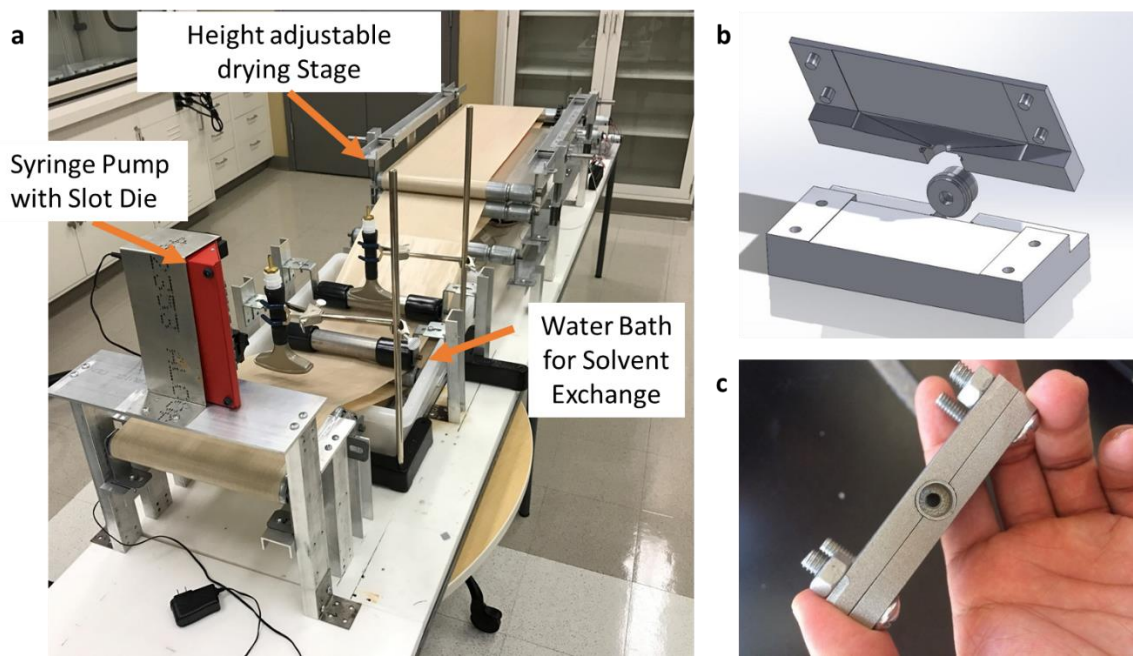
(a) Image of the assembled scale-up prototype; (b) CAD of die attachment; (c) Image of the 3D printed die attachment.
